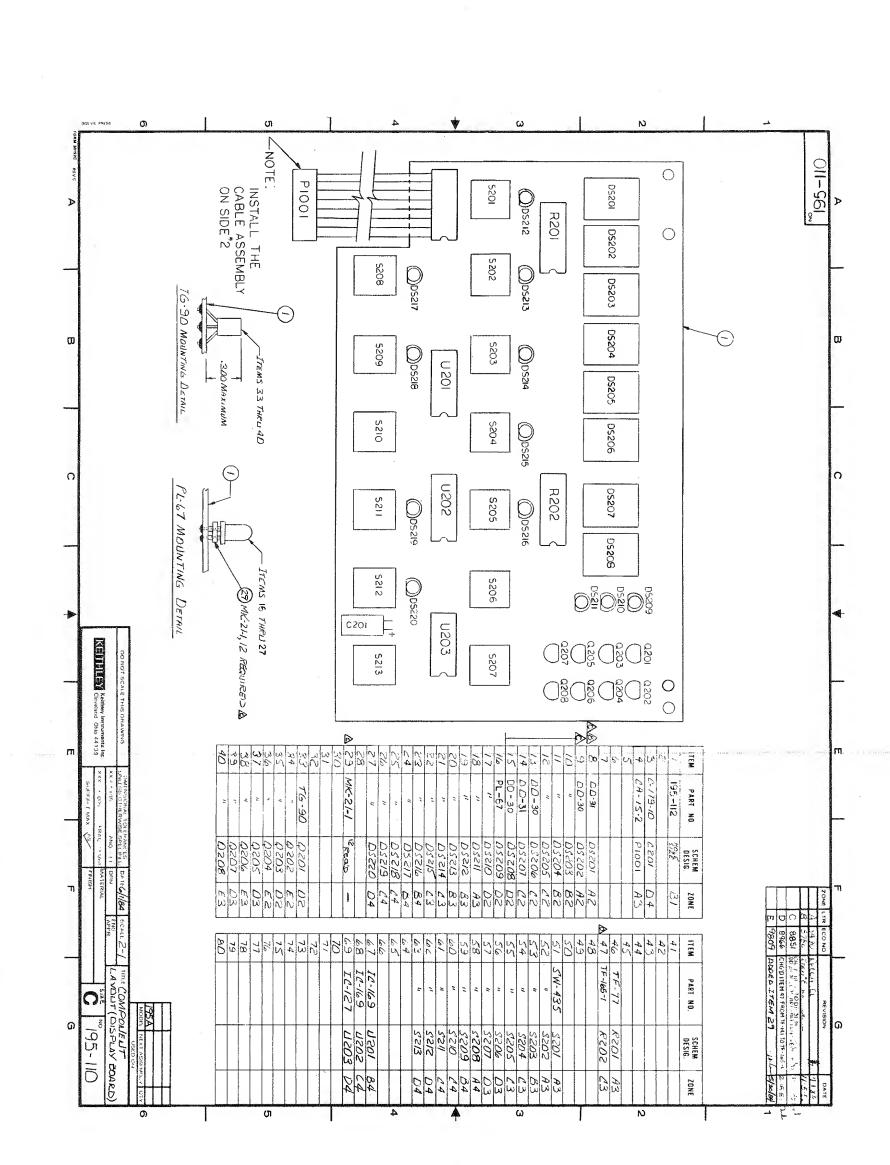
Display Board, Component Location Drawing, Dwg. No. 195-110
